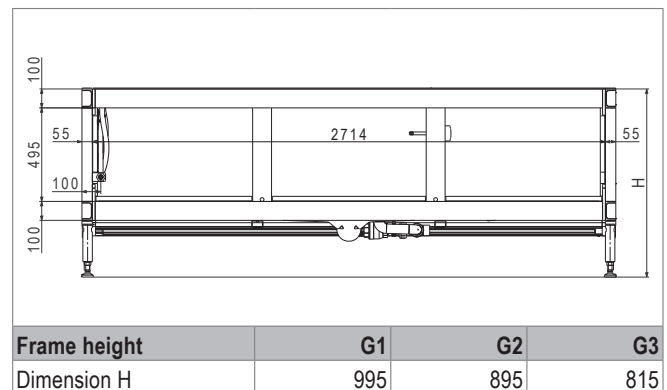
Dimensional drawing supply air duct (dimensions in mm)
